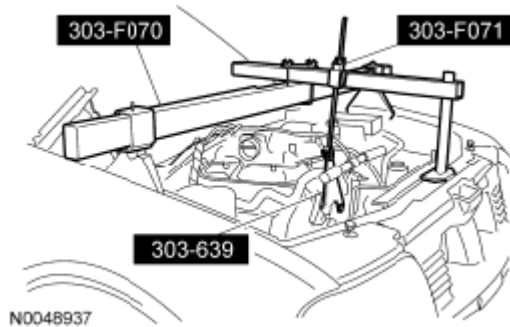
Installing Engine Support Bar, Support Hook And Engine Support Bracket
